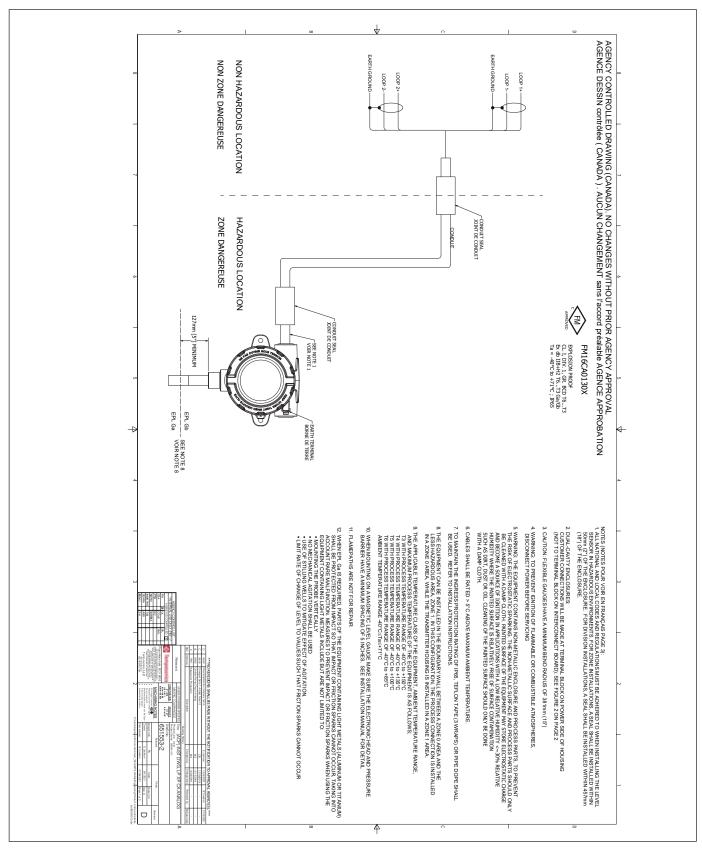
Explosionproof, FMC Installation Drawing, HART®, Page 1
